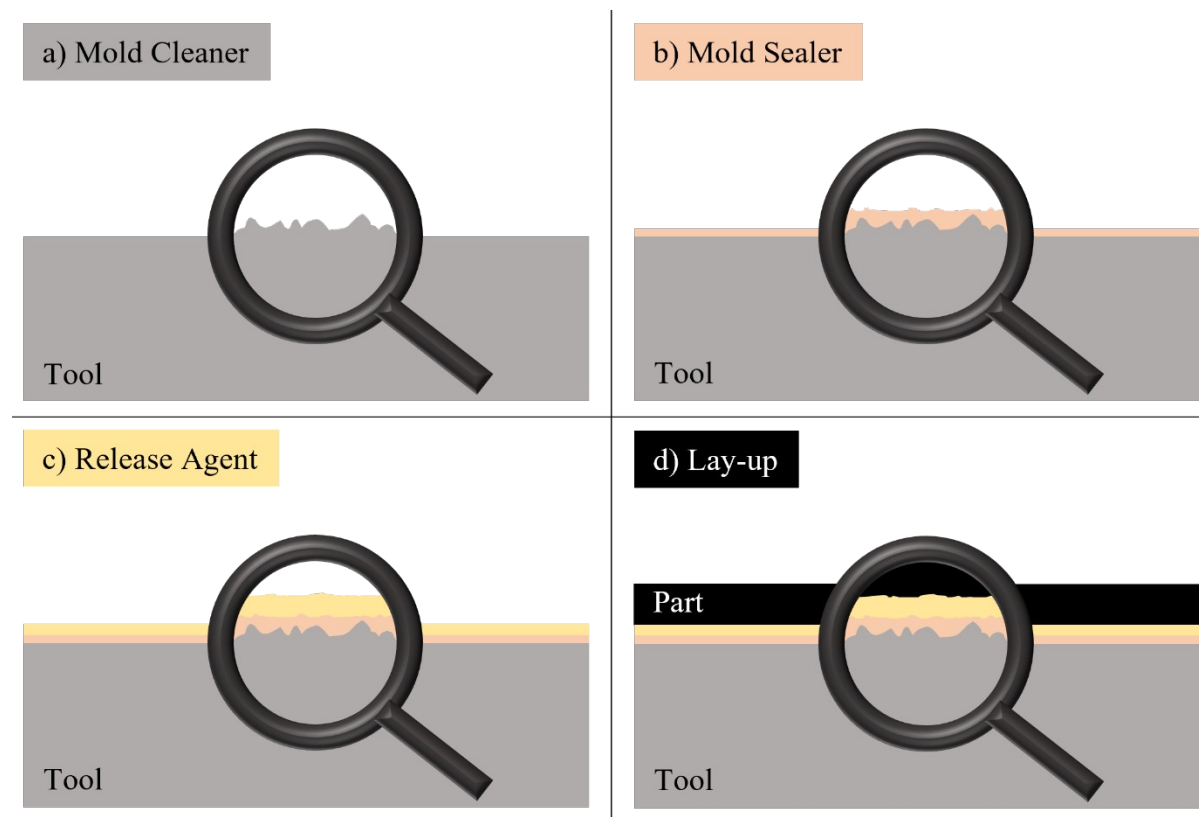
Sequential steps of tool preparation and prepreg lay-up in composites manufacturing. a) Remove residue with mold cleaner. b) Fill-in surface pores and scratches with mold sealer. c) Minimize surface free energy with release agent. d) Lay-up prepreg plies on coated tool surface.
